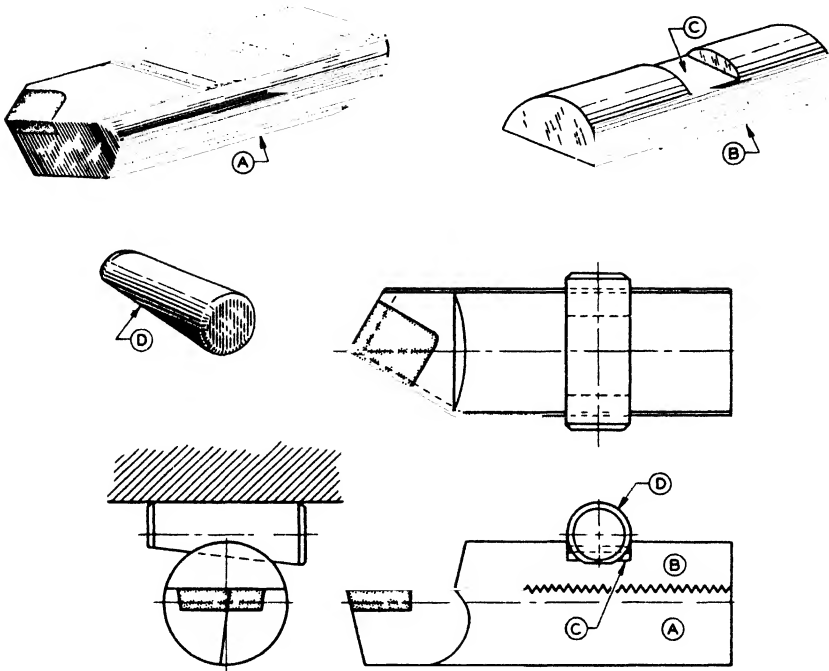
Blade Details for the Lovejoy, Heavy-Duty, Insert-Blade Face Mill
